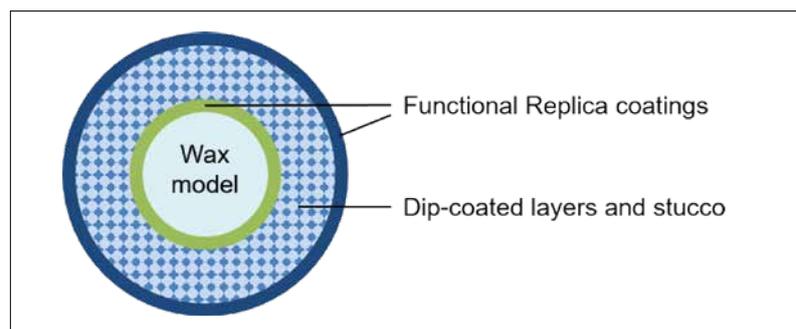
Model of coating composition of investment casting moulds using functional layers
